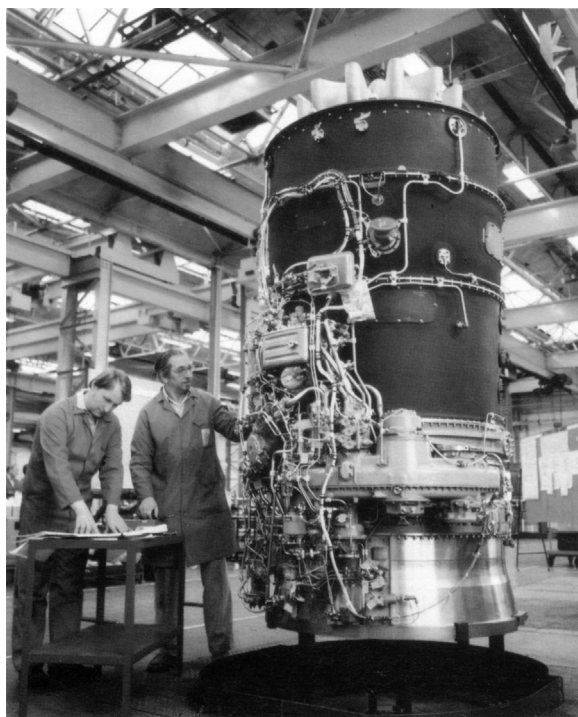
Engine assembly—vertical. (Source: Rolls Royce.)
